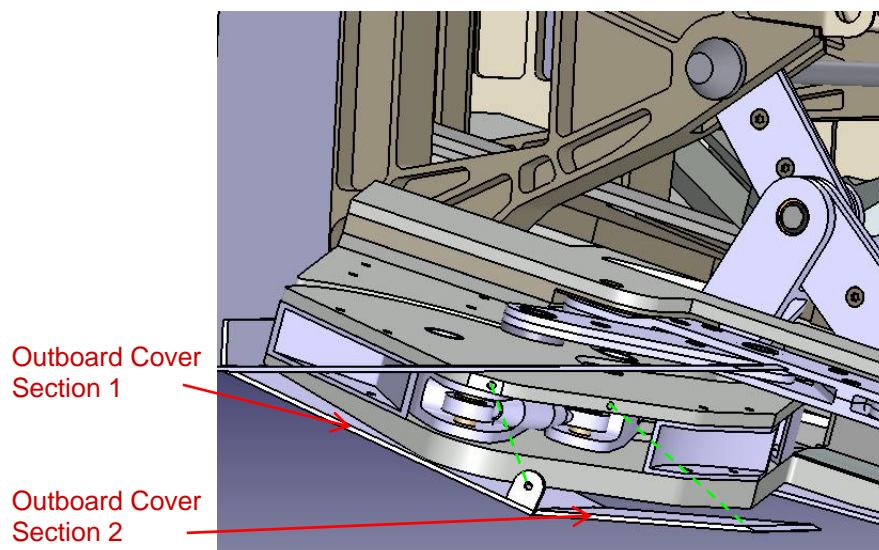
Outboard multi-section bottom cover (flaps fully extended position)
